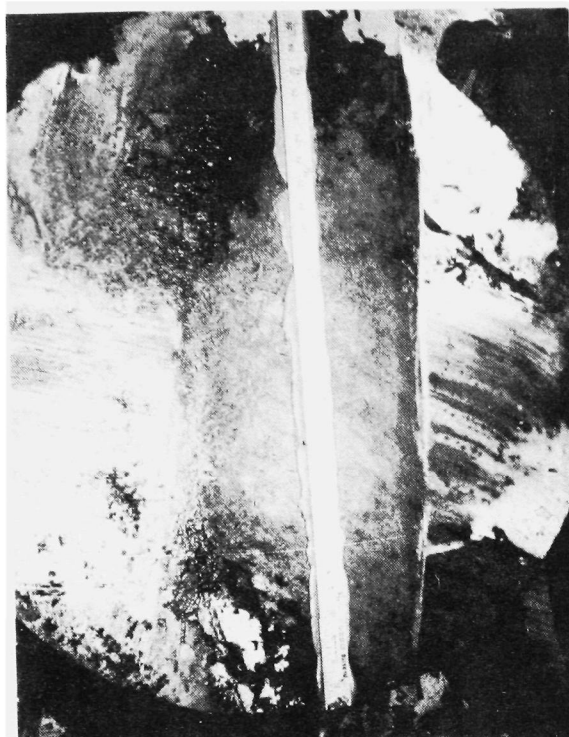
Surface impressions of the discharge valve plates at Descon Concordia (left) and Shelley A (right).
